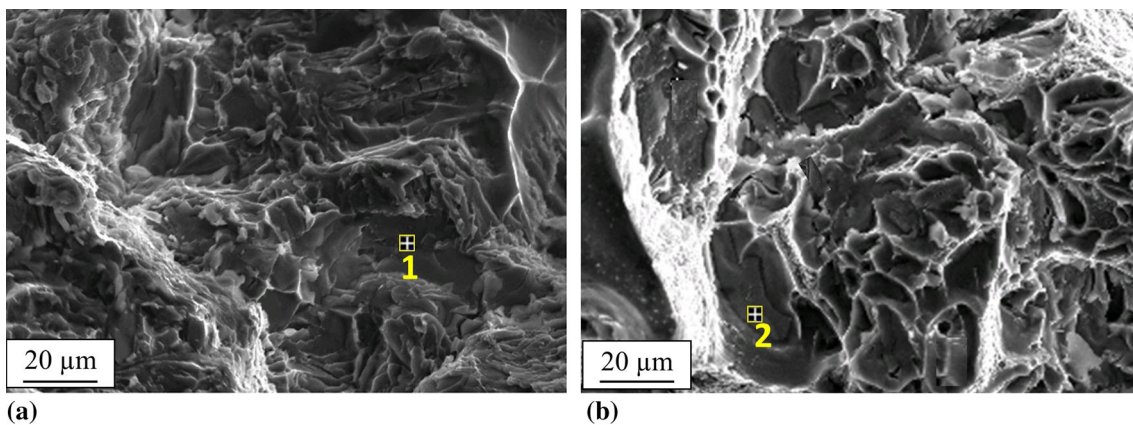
Surface fracture of tensile samples in (a) as-cast and (b) aged condition
